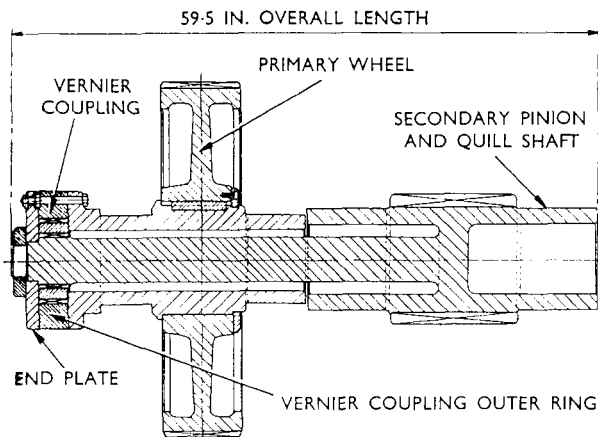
Y.E.A.D.1 GEARING—ASSEMBLY OF PRIMARY WHEEL AND SECONDARY PINION
